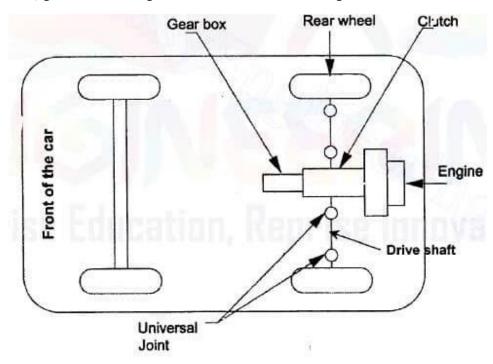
REAR ENGINE REAR WHEEL DRIVE
